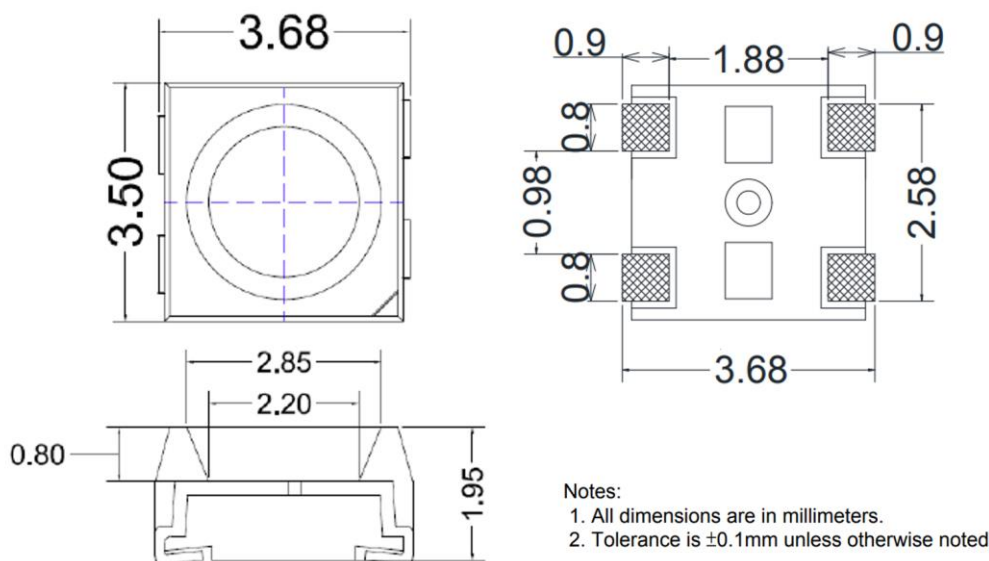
IN-PI33TBTTPRGPB Package Outline Dimensions
